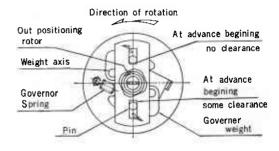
Assembling Centrifugal Advance Mechanism
